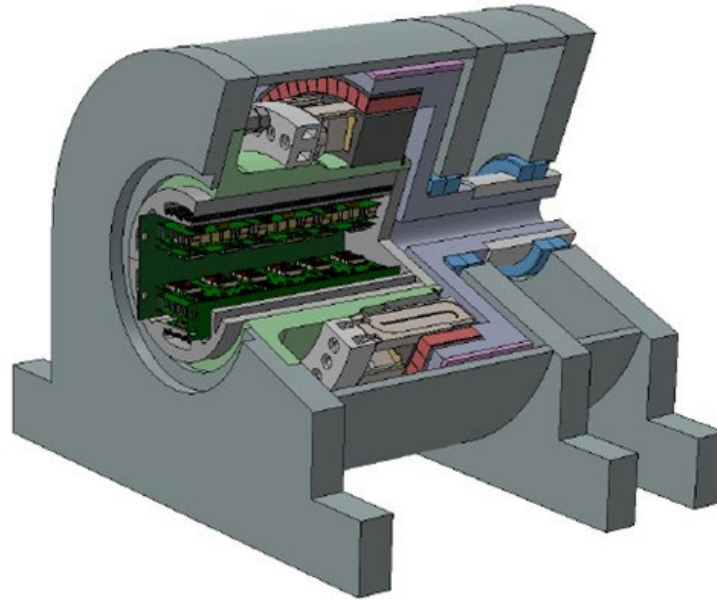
The integrated motor drive shows the outer rotor, stator, heat exchangers, manifold, bearings, external mountings, and power electronics.
